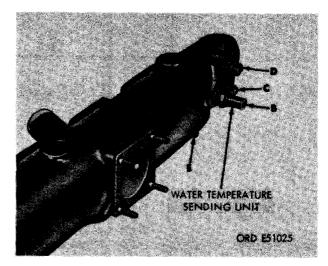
REMOVING OR INSTALLING INTAKE MANIFOLD ELBOW GASKET, WATER TEMPERATURE SENDING UNIT, AND PIPE PLUGS.
